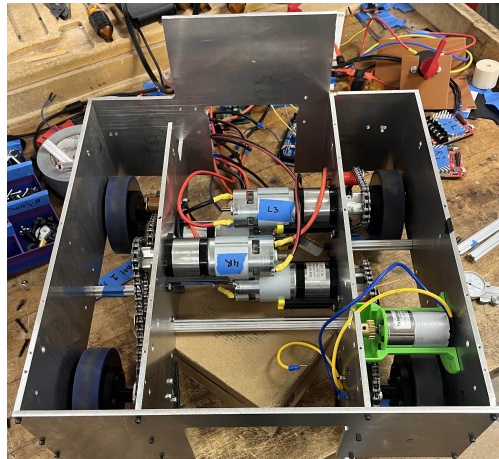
Machined drivetrain without upper assembly or intake subassemblies.
